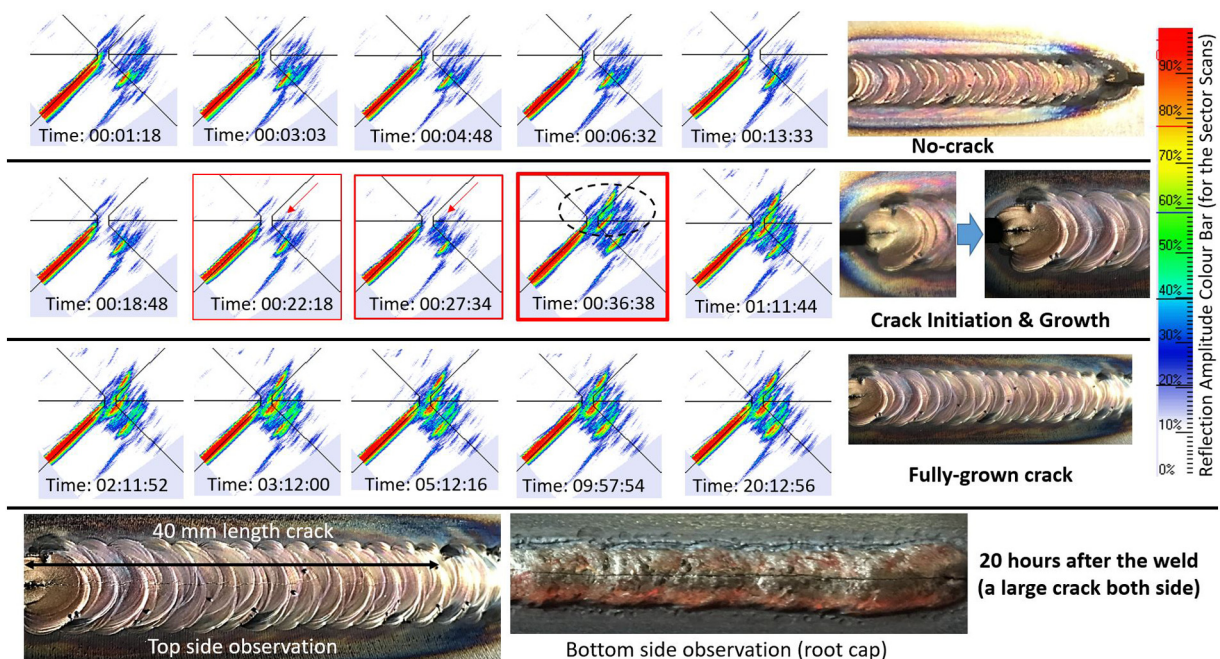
Detection of crack initiation and growth using the in-process phased array inspection of the weld (Sample #3).
